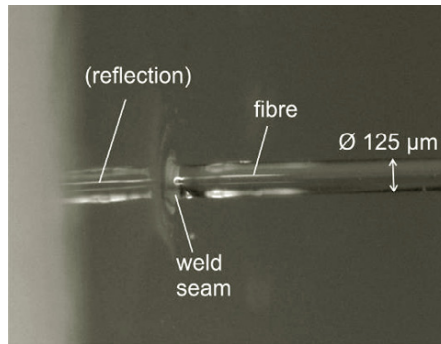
Welded fibre ($t = 15 \text{ s}$, $P = 4 \text{ W}$)
